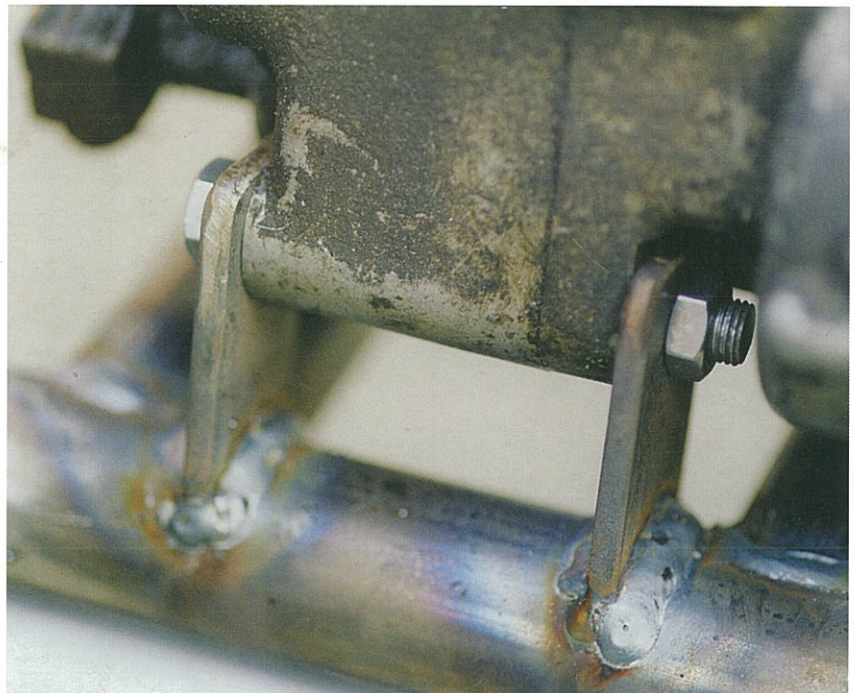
The rear engine/gearbox mounting plates. Again, fully welded. (Steve Williams)
